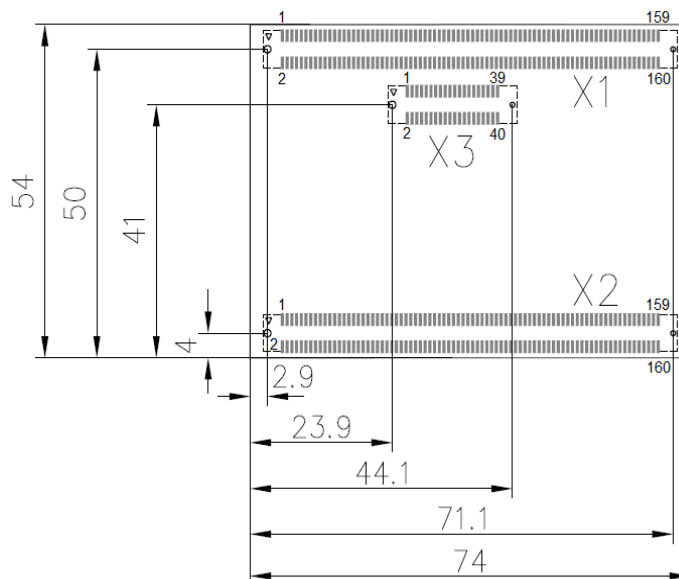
TQMT104x dimensions, top view through TQMT104x
